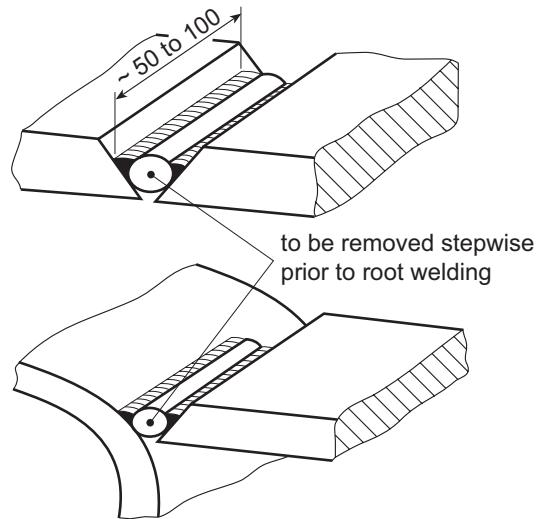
Tack welding in one-side V-grooves
